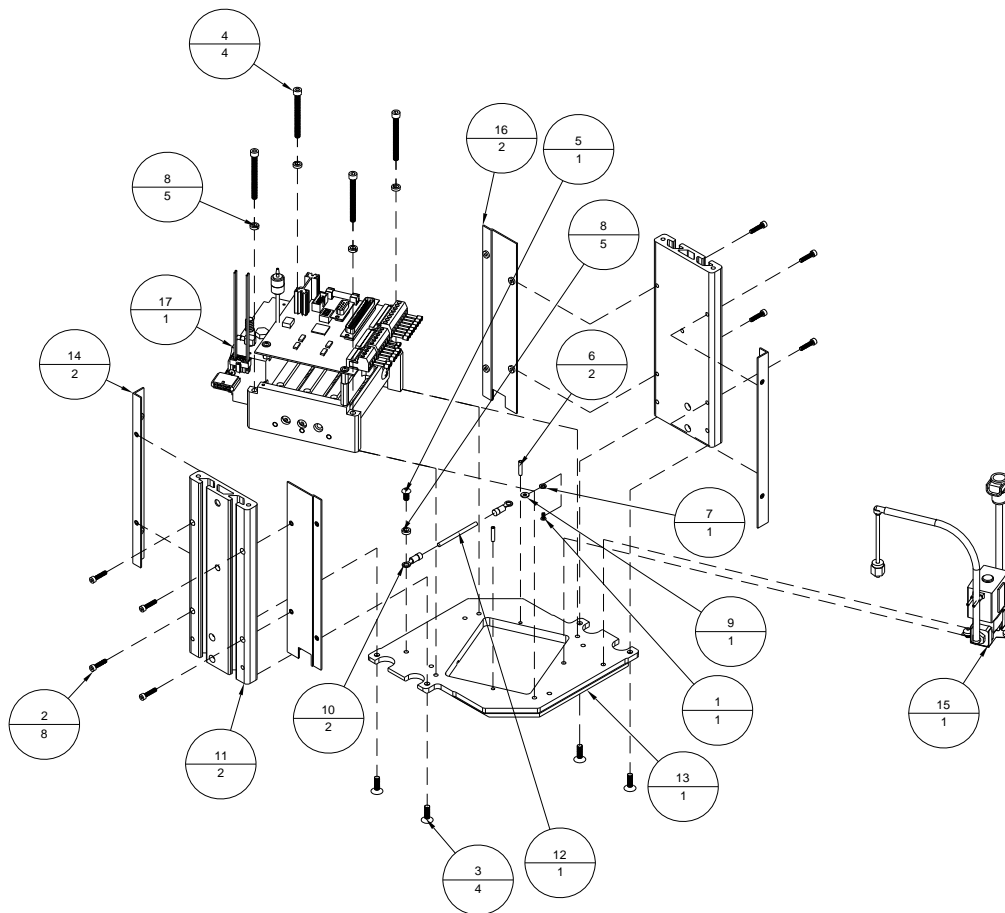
9105160A - Manifold Assembly, Adjustable, 30 pL, Cezanne
